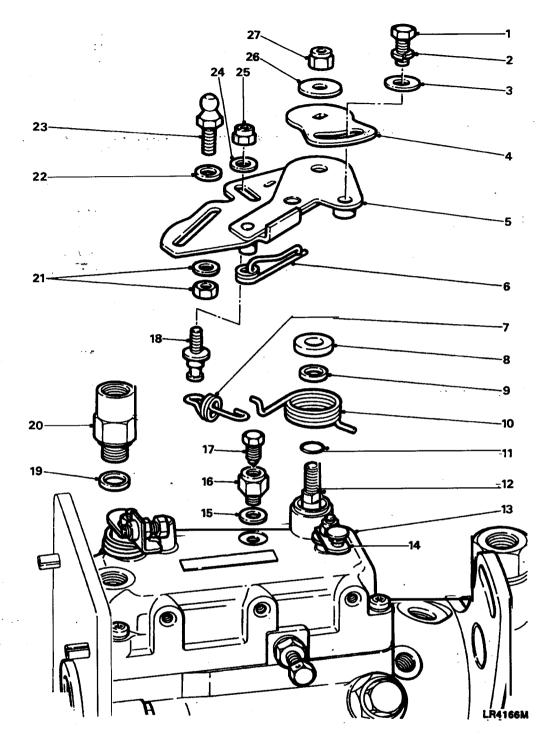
Throttle lever assembly, vent screw and pressurising valve
